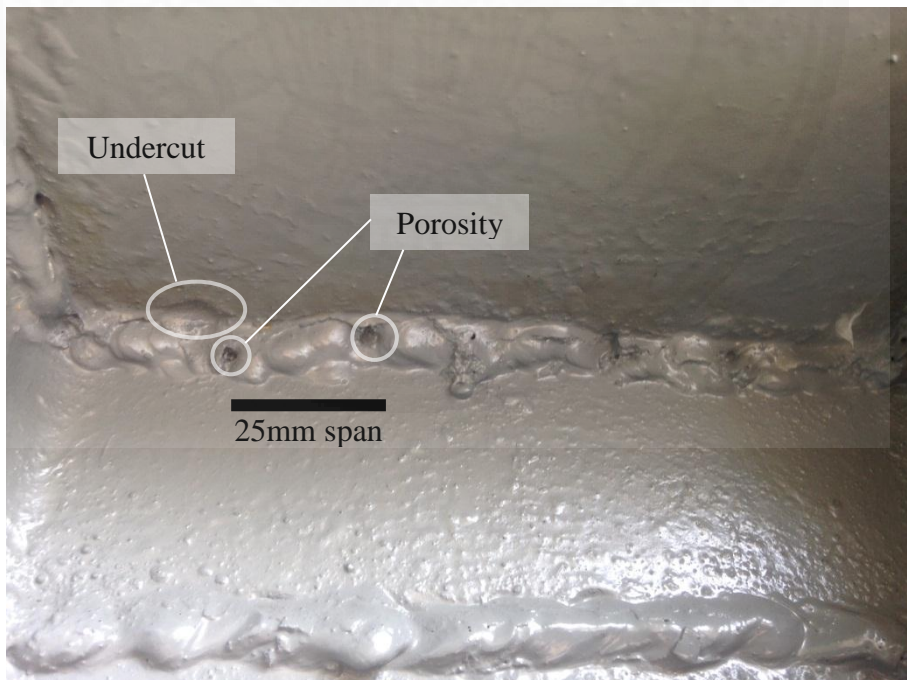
Welding defects on Steel Structure A (joint 2)
